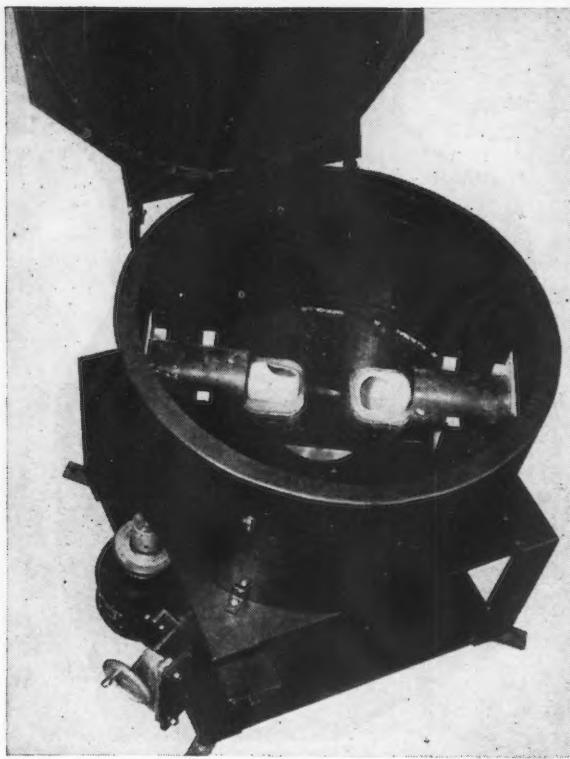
Ecco casting machine for making two casts simultaneously. Molten metal can be poured in the crucible, or the metal can be melted with a torch in the crucible, then rotated for transfer to the mold.
